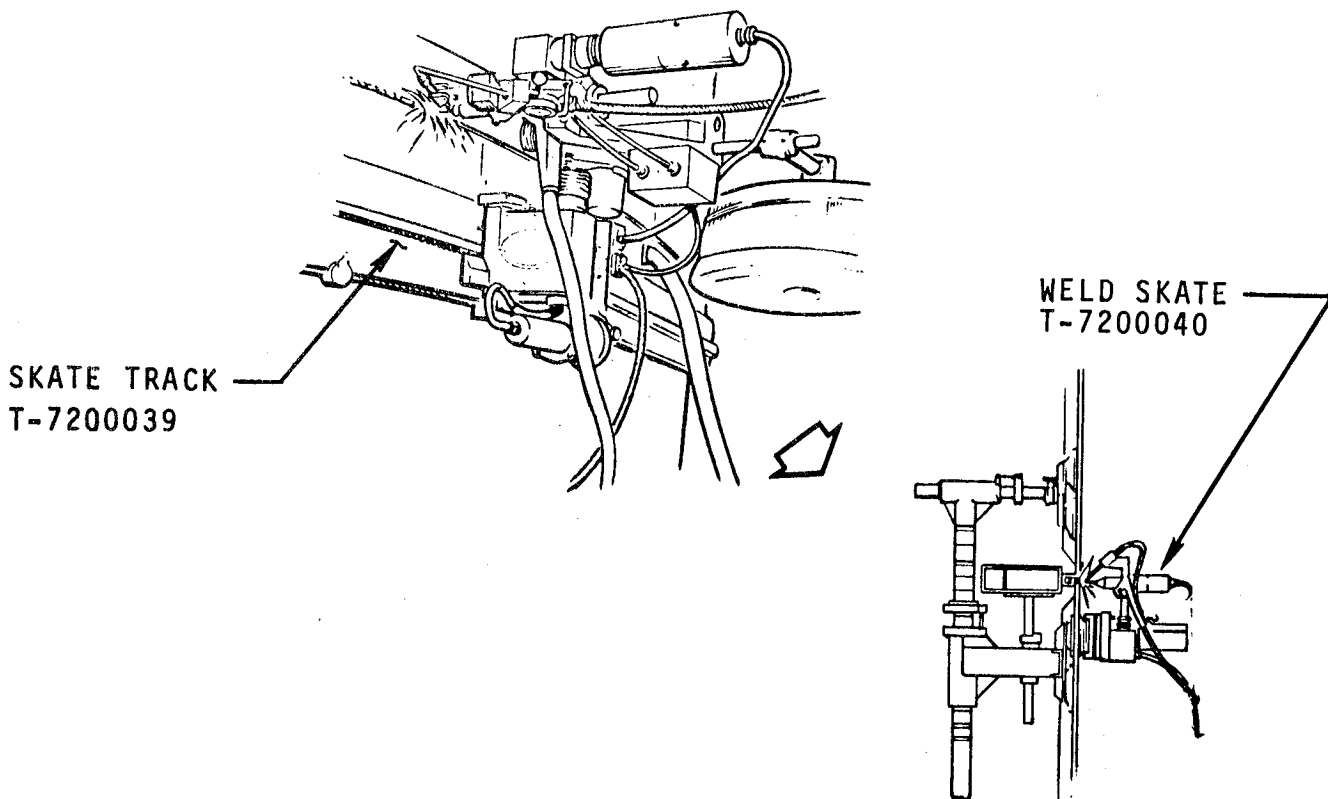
WELD COVER PASS OPERATION
